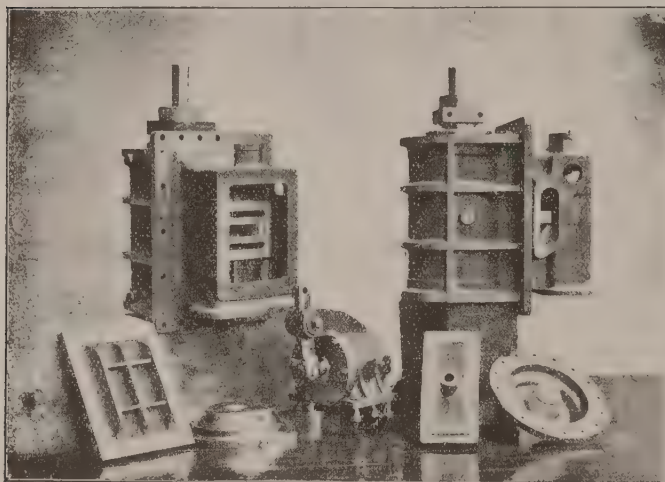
SOME OF THE CASTINGS FOR THE L. & S.W. RY. LOCO.
